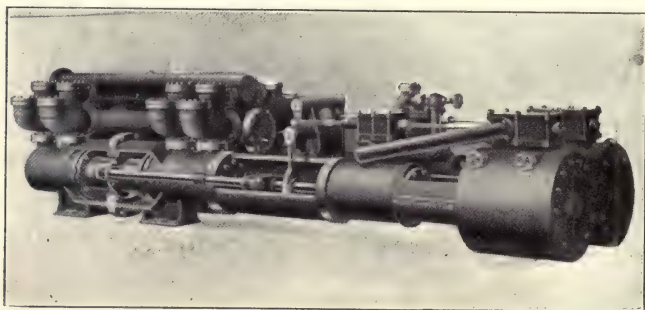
Compound Outside Center Packer Boiler Feed Pump.
